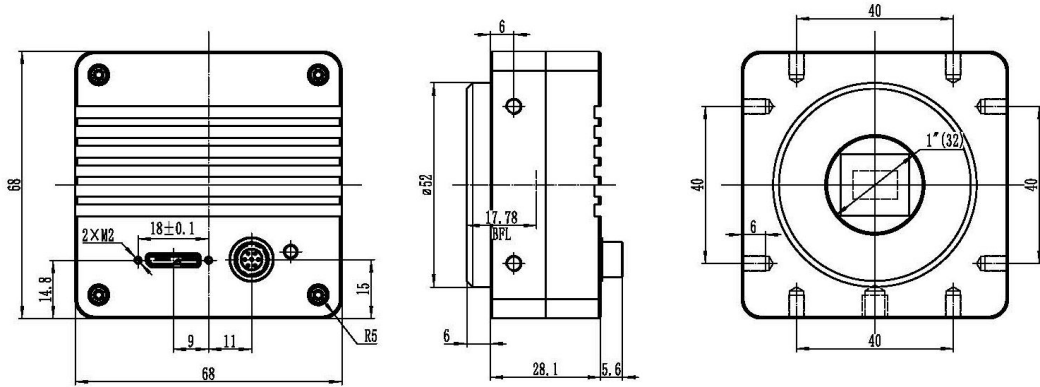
Dimensions of SCM/SCA camera housing (mm)
